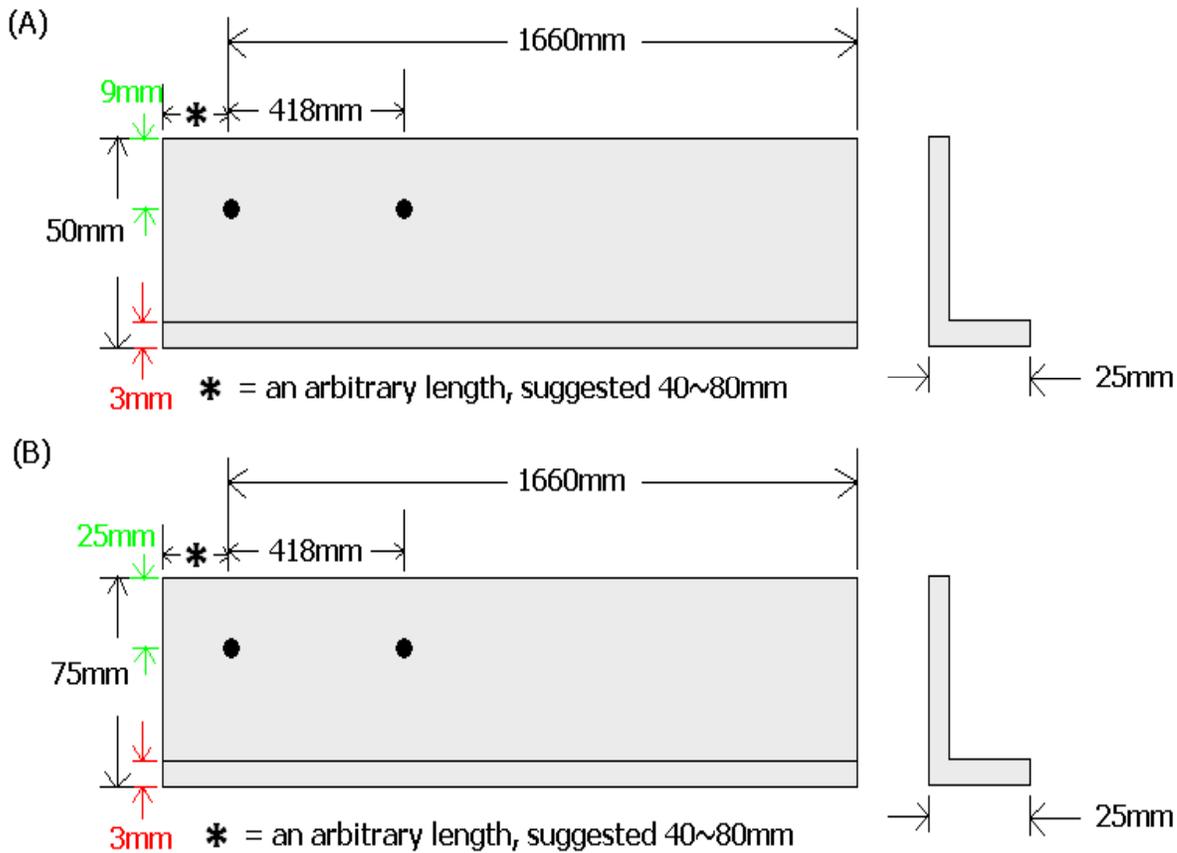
Aluminum support rail dimensions: (A) x-plane, (B) u/v-plane
